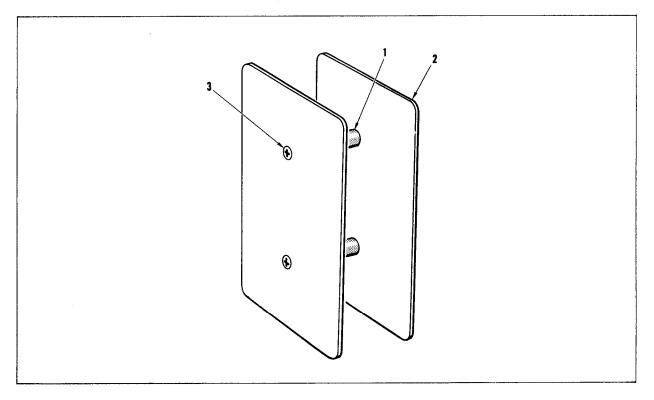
Cable Reel, Part No. 171589, Location of Parts
